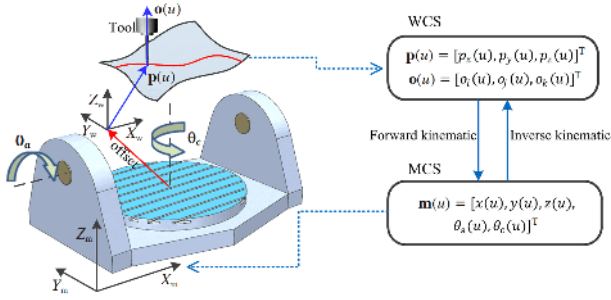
(Color online) Kinematics configuration of the tilting-rotary-table type five-axis machine tool.
